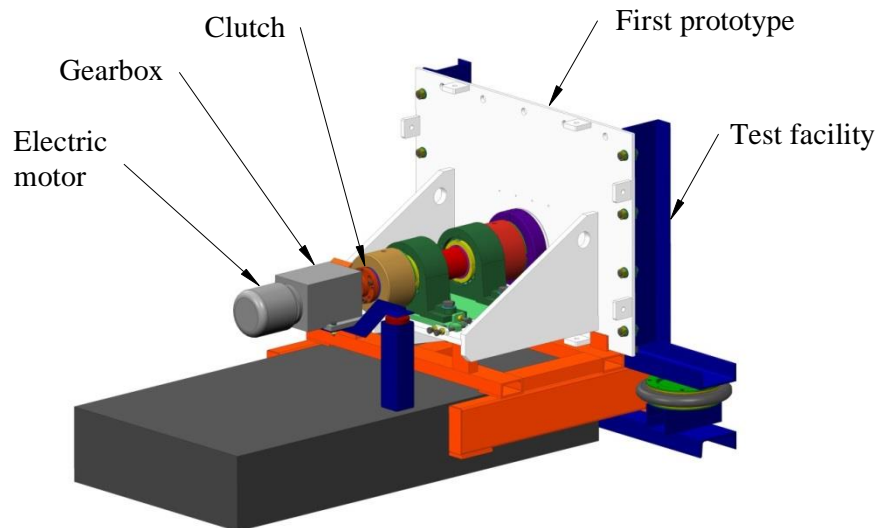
Drive system for the first prototype's sprocket shaft during the load test
